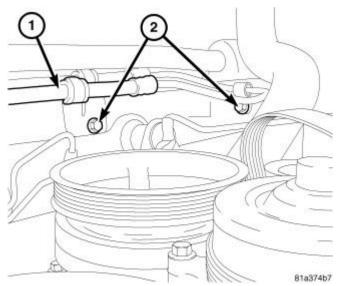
Engine Mount Courtesy of CHRYSLER LLC
